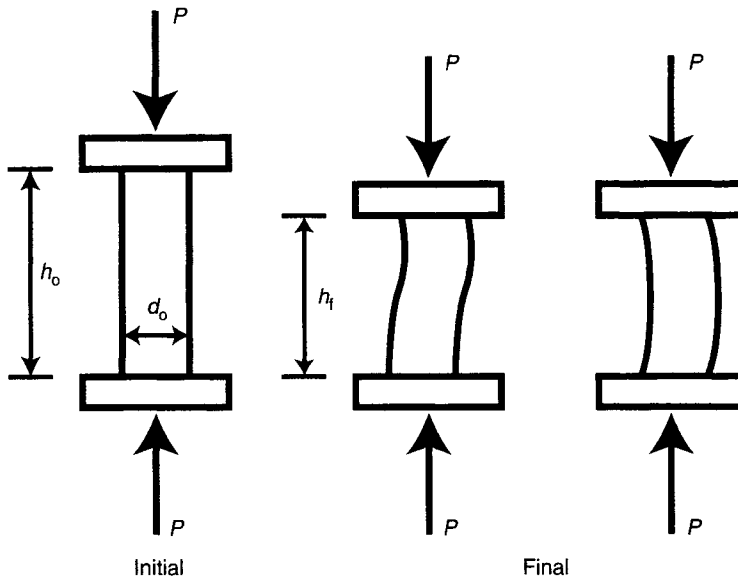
Buckling of a tall cylinder during open die forging.
